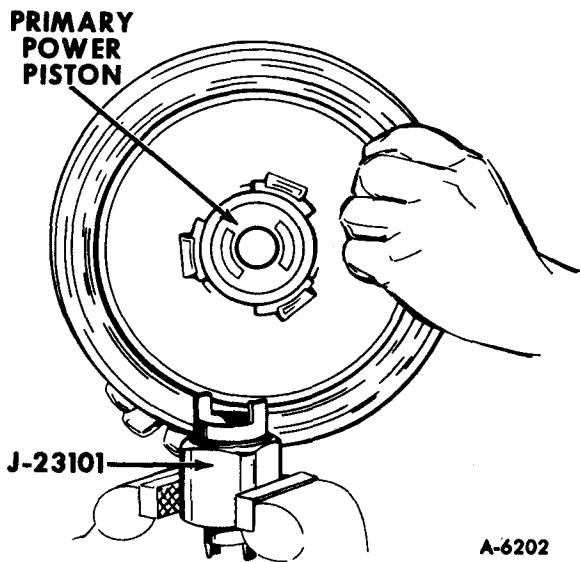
Positioning Primary Power Piston in Tool J-23101 (Small Dia. End Up)
